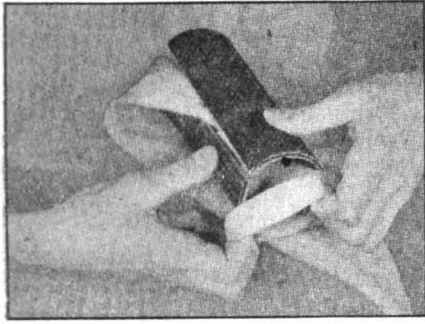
ONE END OF TIRE IS PLACED OVER LARGE MANDREL
